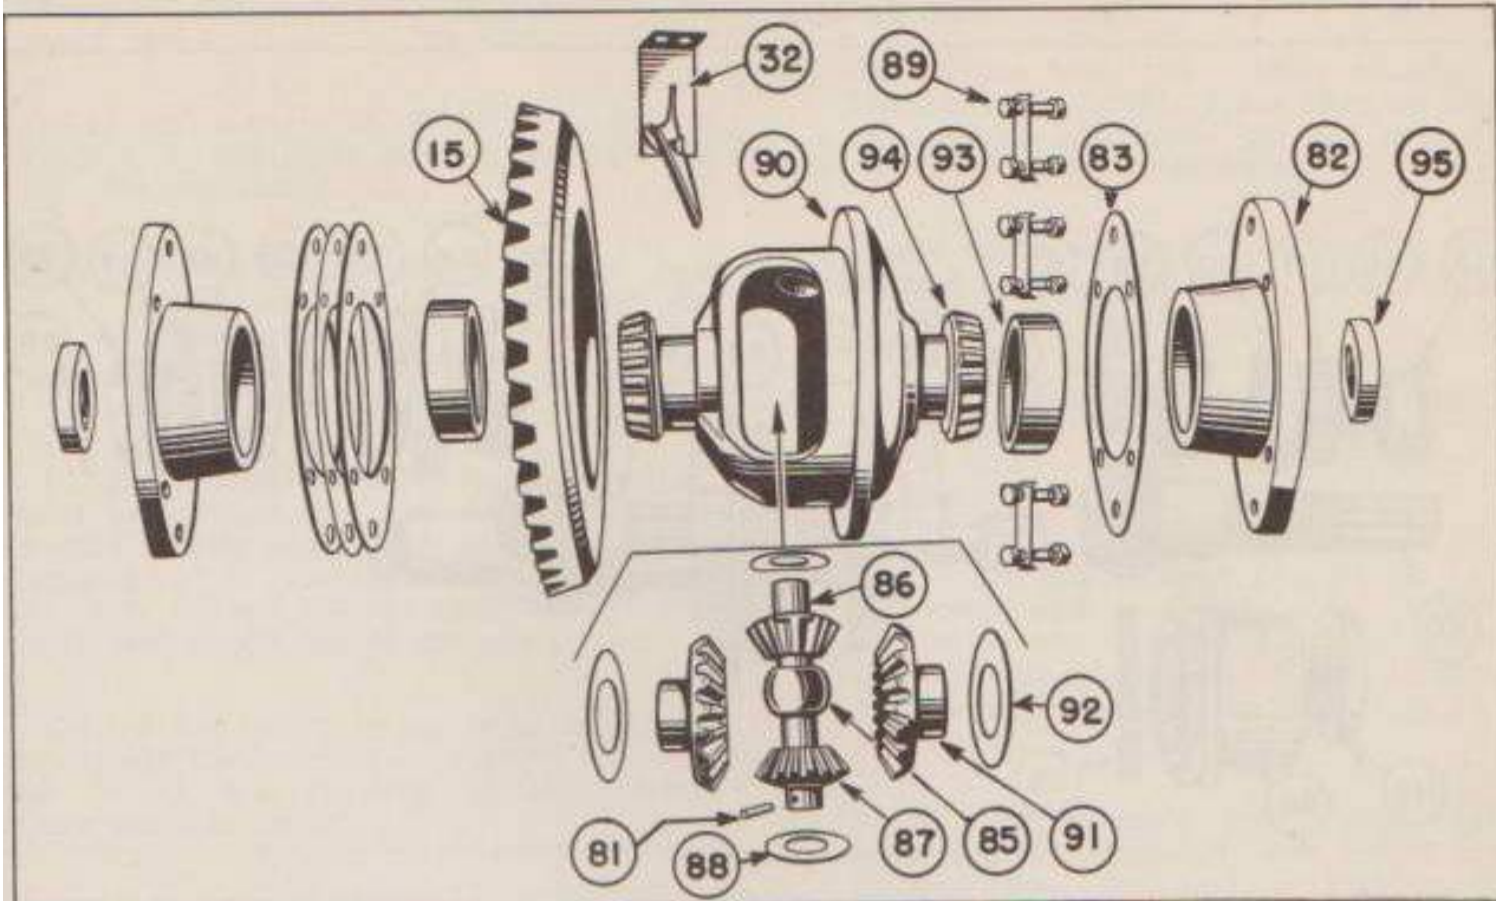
DIFFERENTIAL ASSEMBLY
